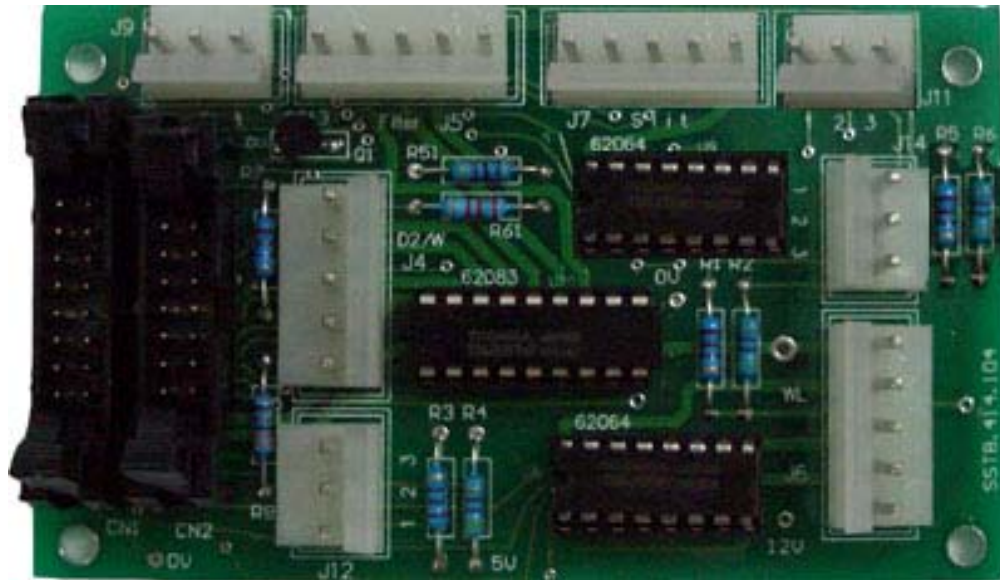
Layout of UV-2802S,UV-2802PCS Drive PCB
